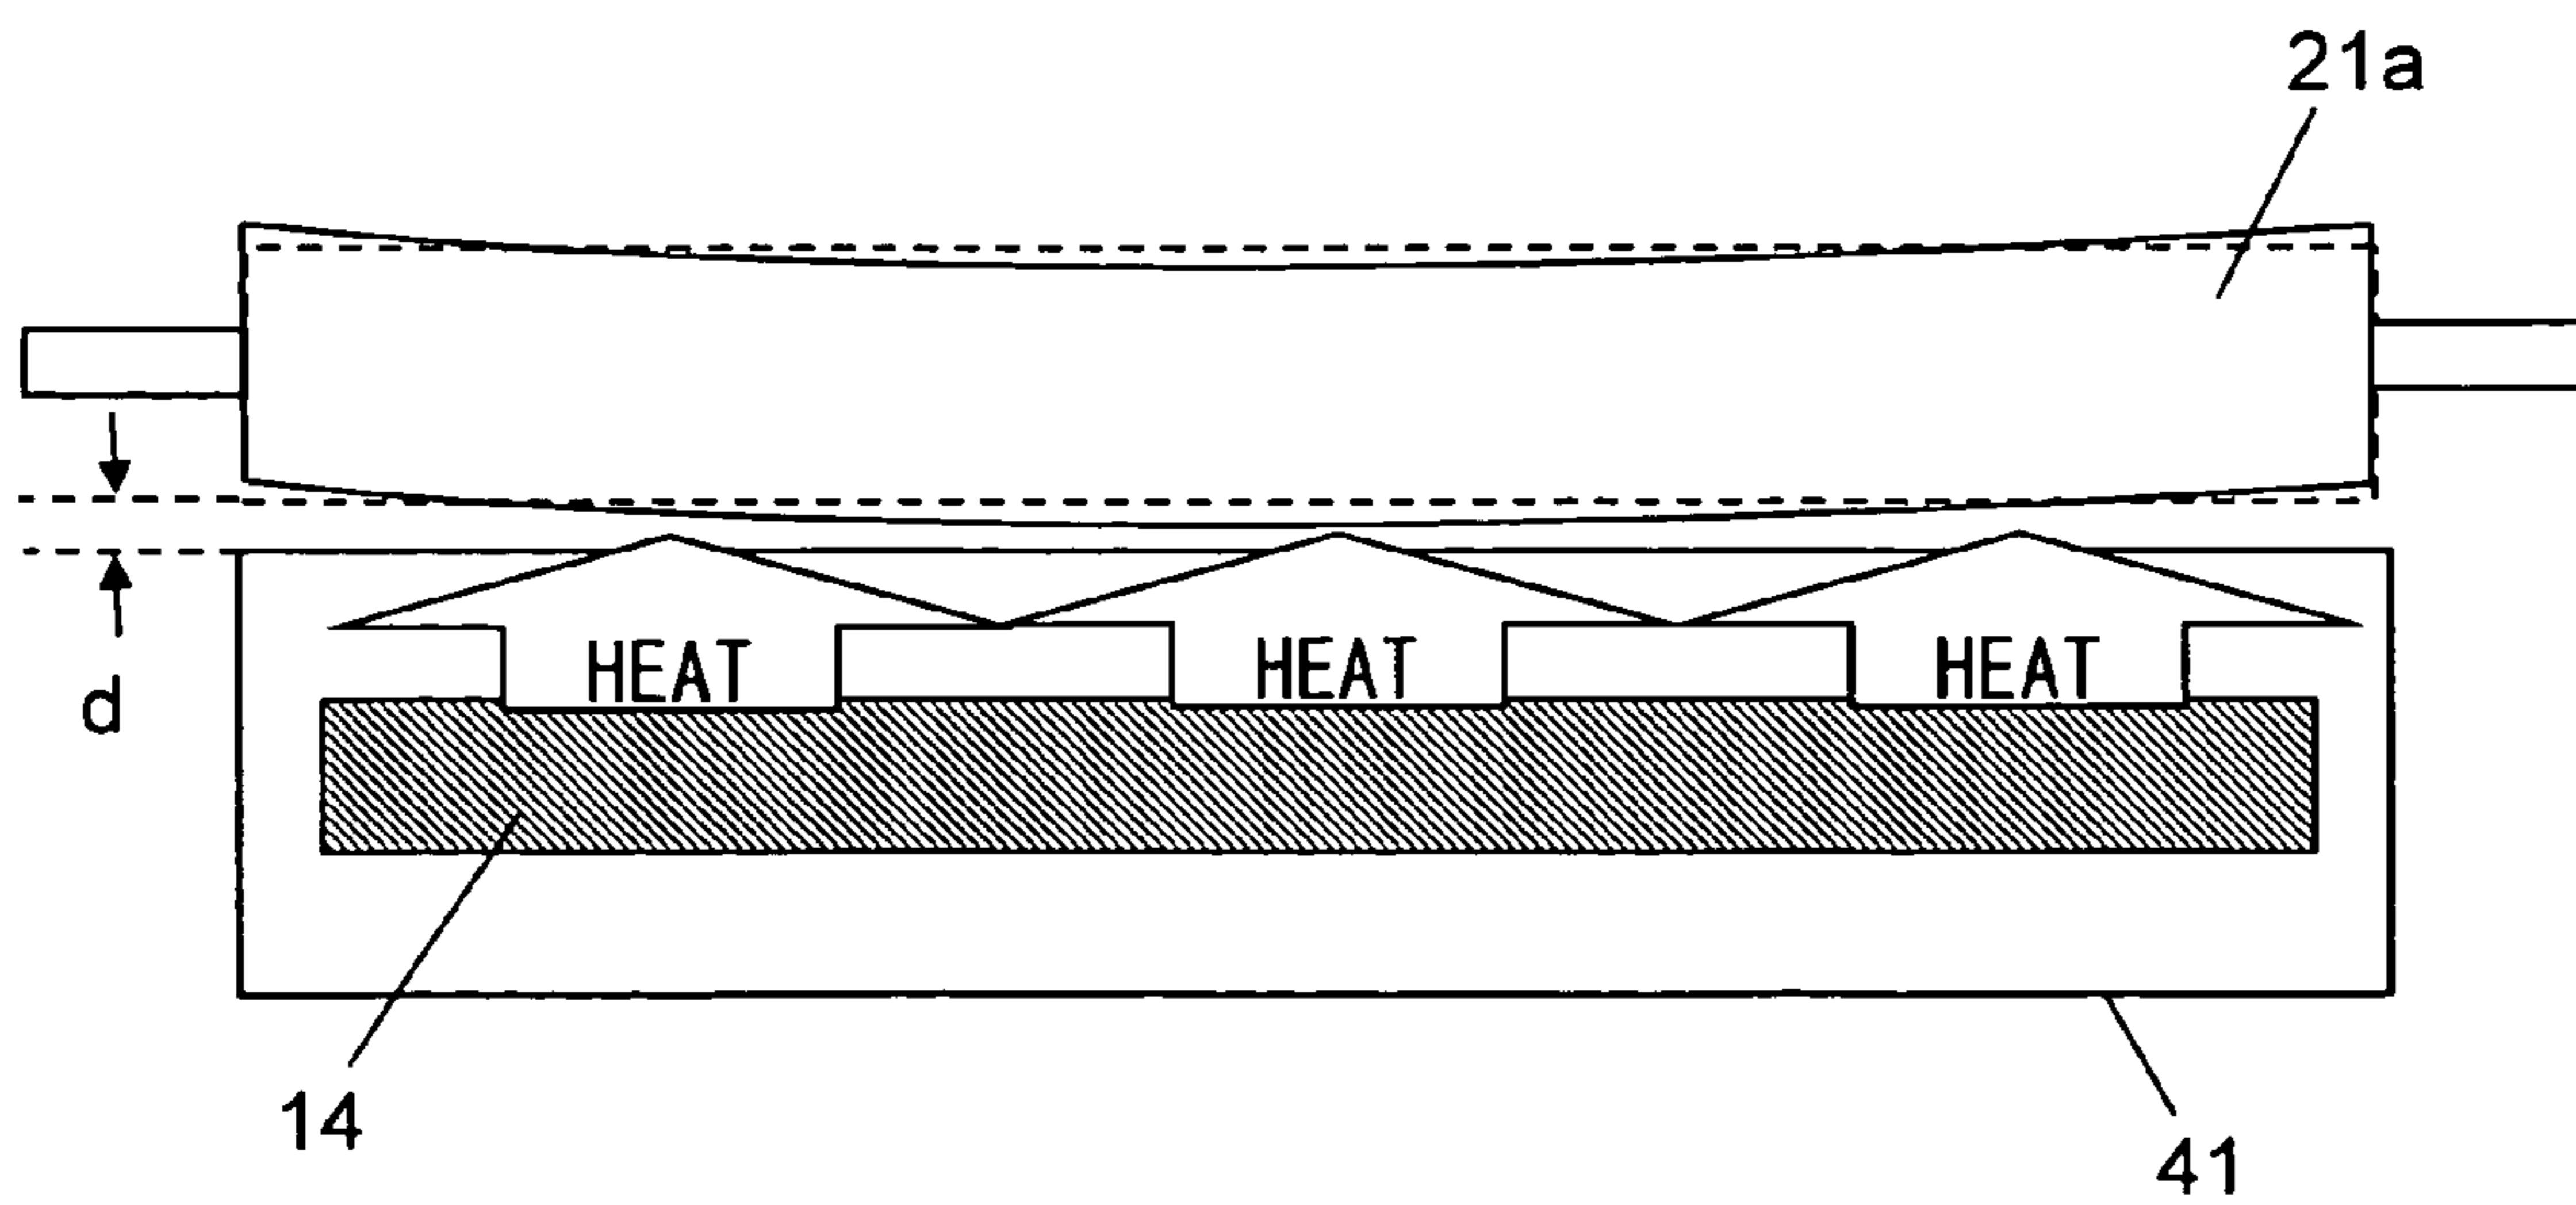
IMAGE FORMING APPARATUS COMPRISING A DEVELOPER ROLLER
